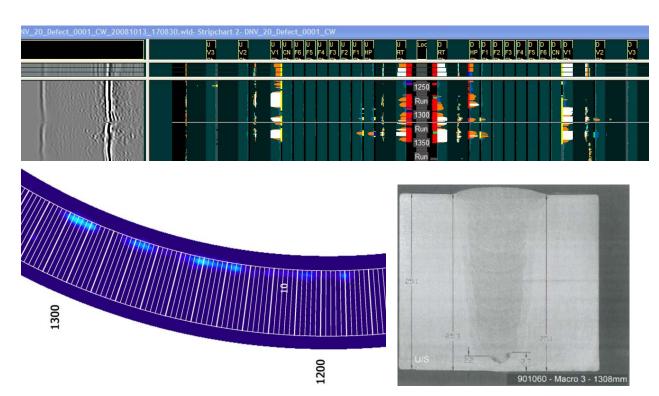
AUT-scan, immersion UT scan and macro section at position 1308 of defect 1-3. The scale on immersion UT scan appears shifted compared to AUT scan, macro position is at position about 1276 mm on immersion UT scan. Macro shows defect height of 2.7 mm at DS-side.
